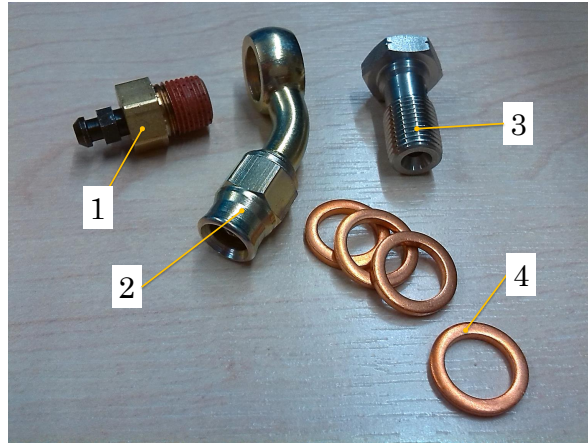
Fitting and standard parts used in the prototype caliper: 1) Wilwood bleed screw (Part No. 220-4269), 2) Goodridge banjo inlet fitting 45°, 3) Goodridge banjo bolt M10x1, 4) Goodridge crush washer 10 mm.
